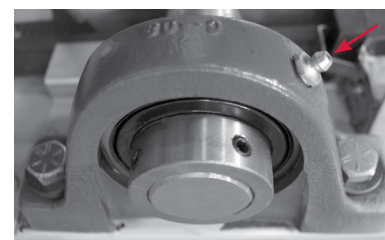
Pump grease into two rotor bearing grease points, one on each side of the rotor.
